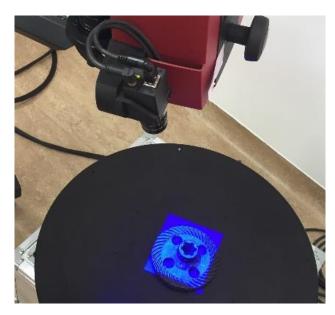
A view of the face gear measurement using an ATOS 3D scanner on a standard rotation table
